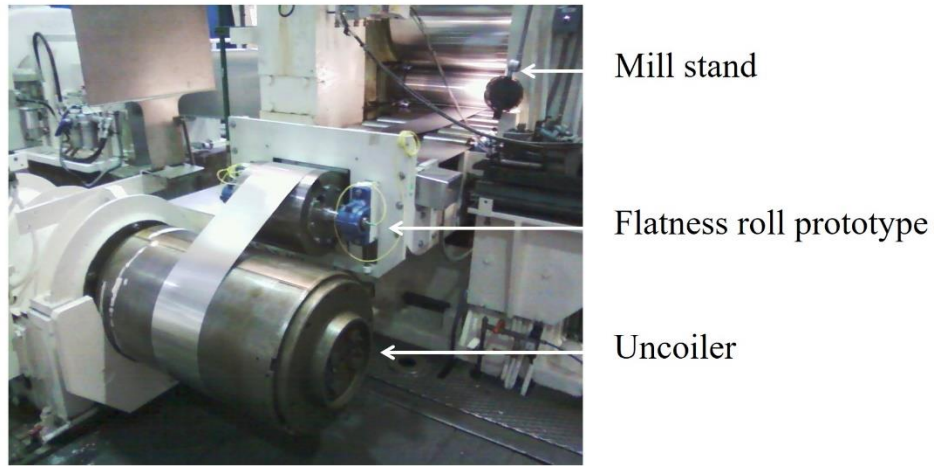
View of the flatness roll prototype mounted onto the table between the uncoiler and the cage of the Spidem mill stand at Constellium facility.
